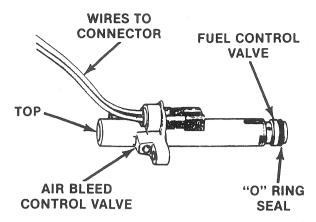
Holley-style solenoid. (Courtesy of Chrysler Motors Corp.)
